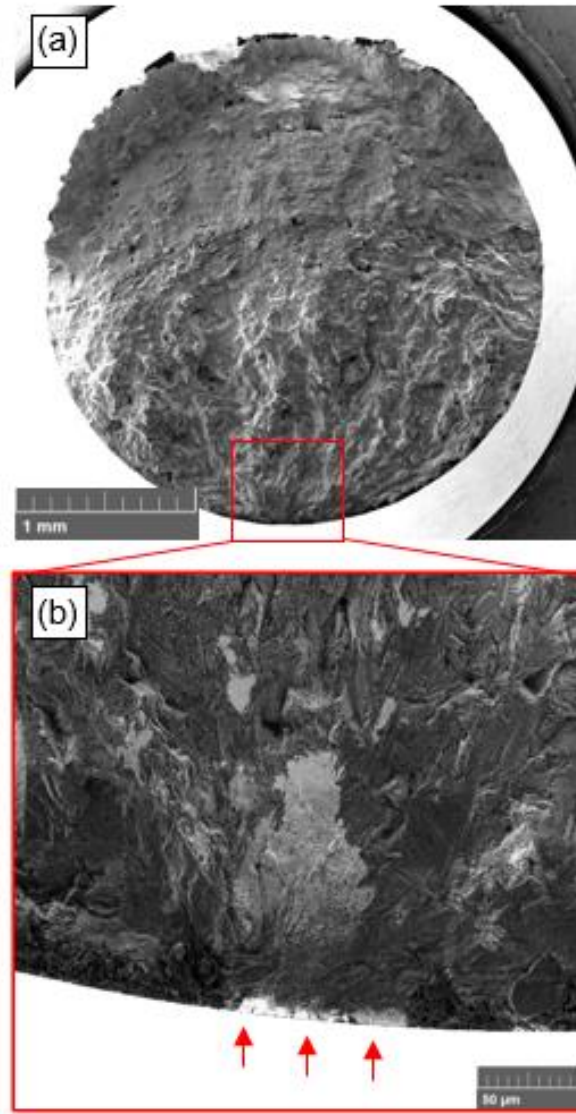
SE fracture surface images a machined V LB-PBF Inconel 718 specimen tested at $\sigma_a = 800$ MPa with a corresponding fatigue life of $2N_f = 3.89 \times 10^5$ reversals. The overall fracture surface in (a) shows a single crack initiation site, which is magnified in (b).
